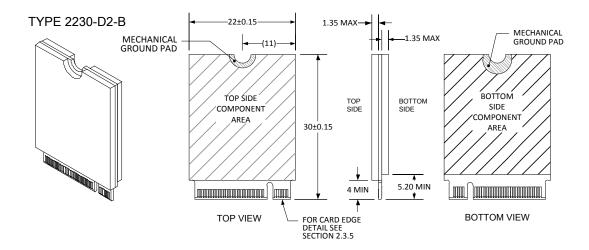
M.2 Type 2230-S2/D2 Mechanical Outline Diagram Examples
